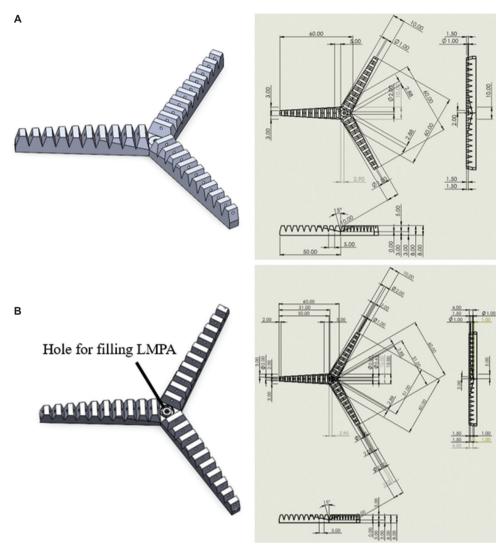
Design for pure soft gripper and LMPA-integrated soft gripper (A) Designed soft gripper of pure TPU (dimension unit: mm); (B) designed soft gripper of LMPA-integrated TPU (dimension unit: mm)
